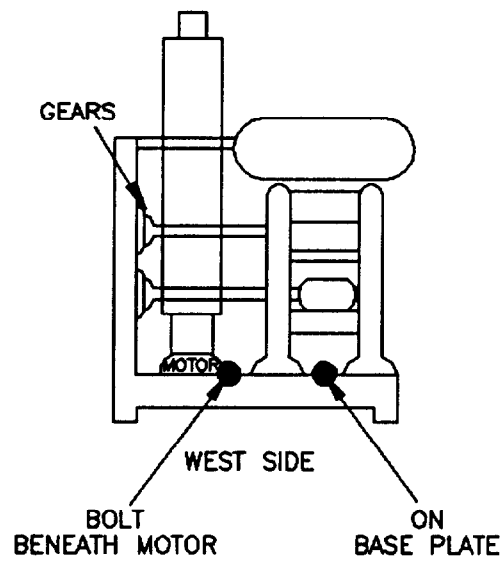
Building 30, Fabrication Room, Brinell Hardness Testing Machine #34274 - Measurement Locations
